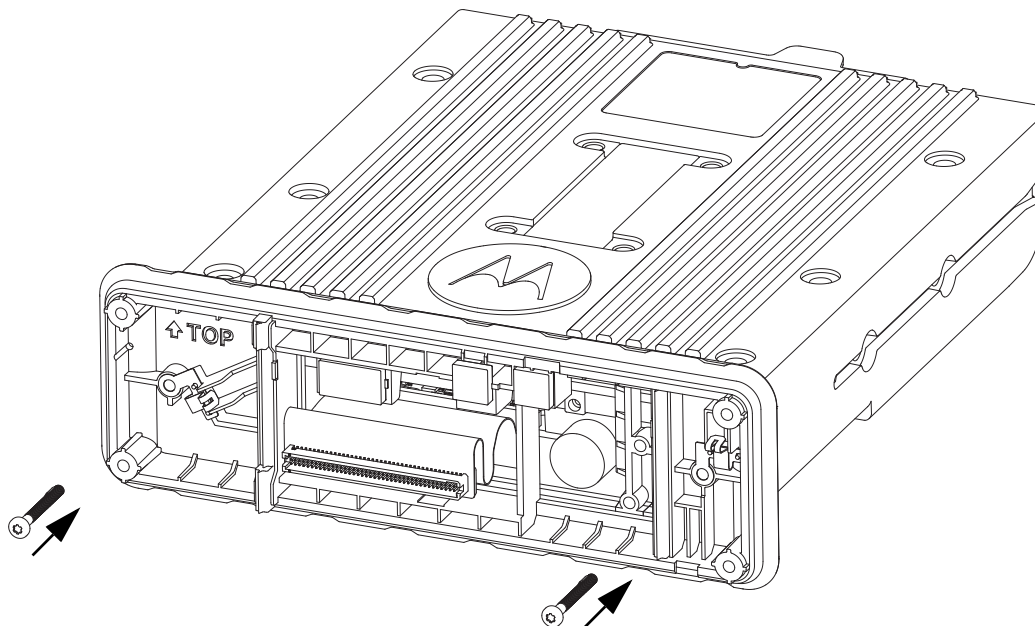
Installing the Back Housing Assembly onto the Transceiver
